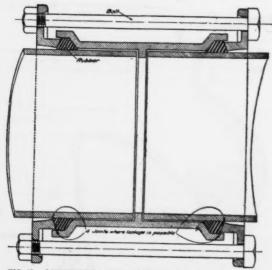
LONGITUDINAL SECTION OF GAS PIPE COUPLER SHOWING FOUR POSSIBLE LEAKAGE JOINTS.
